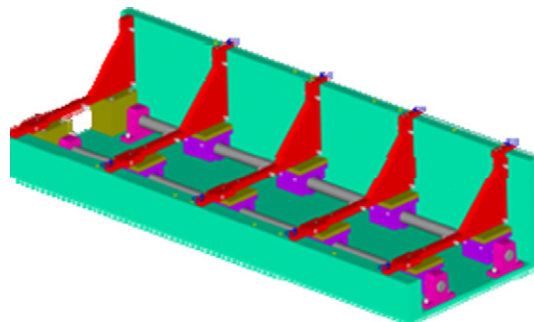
Assembly fixture to locate shelves for assembly of cabinets (pioneer industrial systems LLC.) [21].
